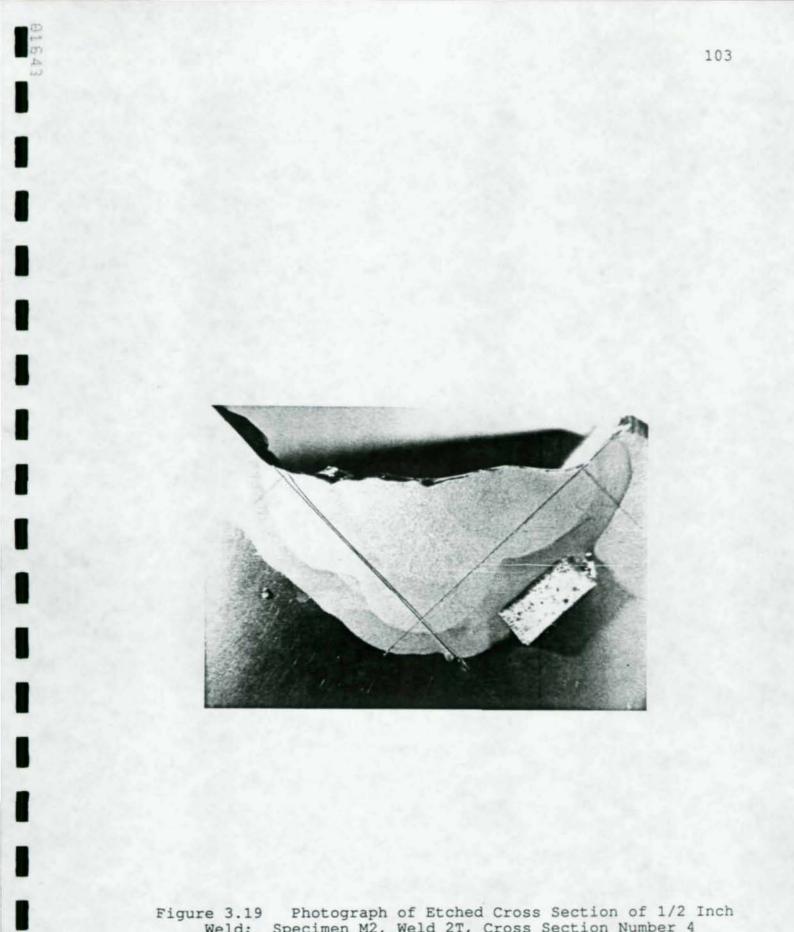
Photograph of Etched Cross Section of 1/2 Inch Weld; Specimen M2, Weld 2T, Cross Section Number 4
